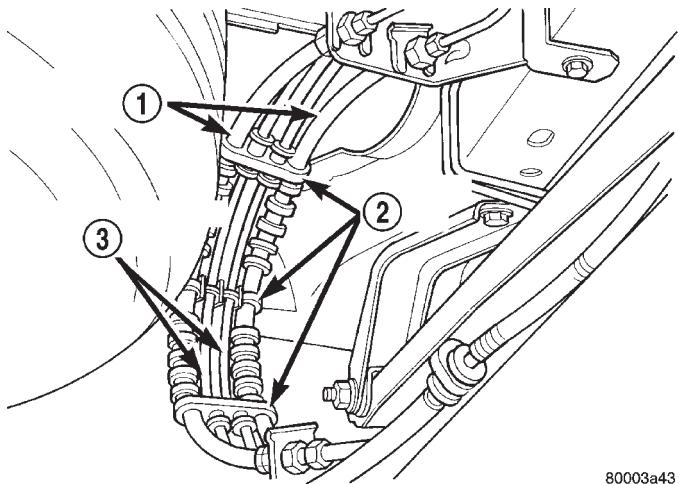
Speed Sensor Cable Attachment To Brake Flex Hose
